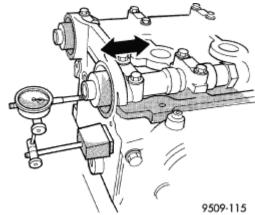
Checking Camshaft End Play Courtesy of CHRYSLER LLC
